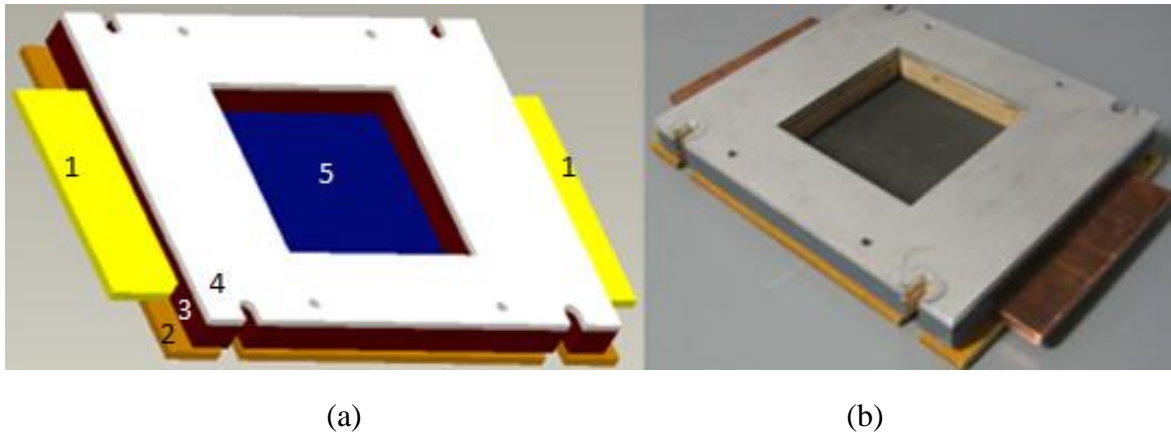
Test Fixture (a) Solid Model (b) Fabricated Assembly (Zantout, 2009)
